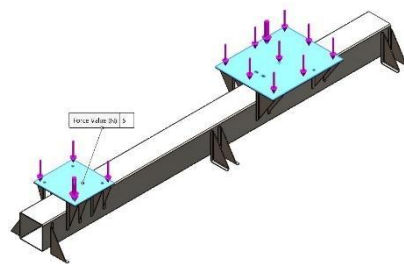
3D Model of Current Gearbox & Motor Support Bracket Design
